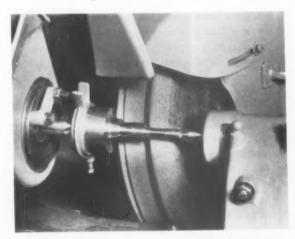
Here is shown a machine plunge-cut grinding a spindle with two spacing wheels.
